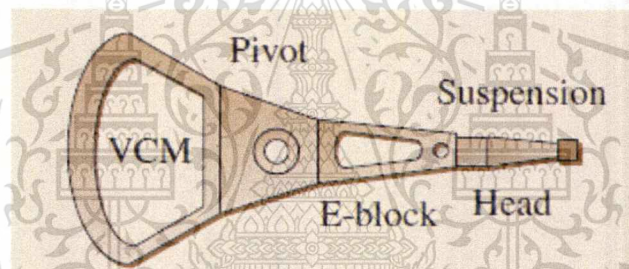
Schematic diagram of a head stack assembly (HSA) [5].
